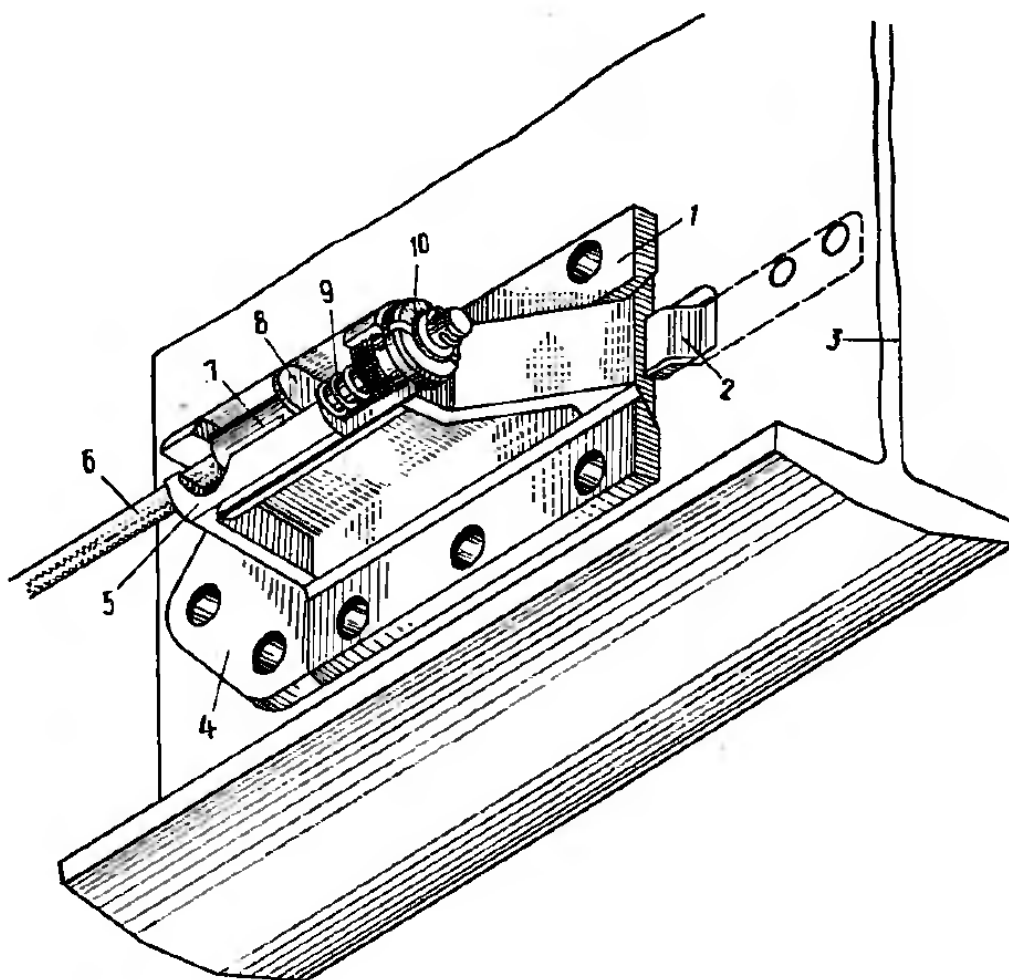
The clamp of the cable end: 1 – overlay; 2, 9 – springs;
